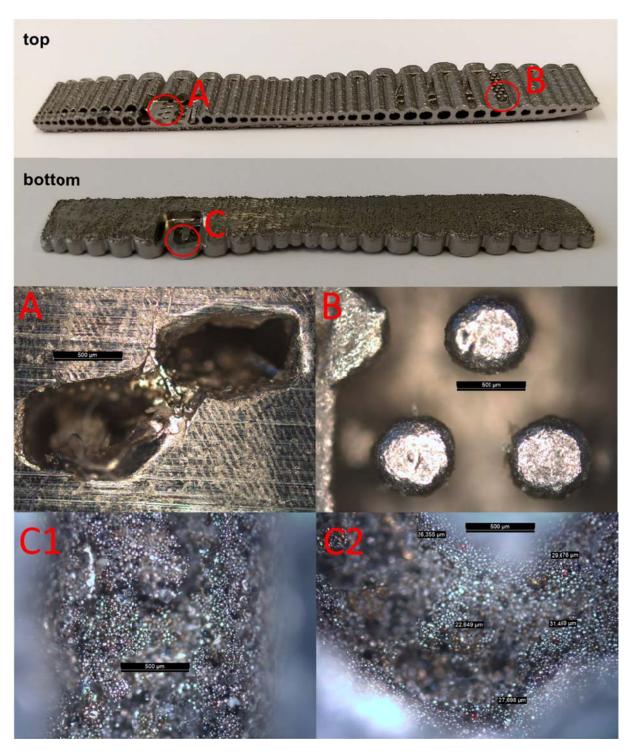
Microscope pictures of the test print using 316L stainless steel powder. (C1 and C2) Unmolten particles are fused on the top surface of the channel.
